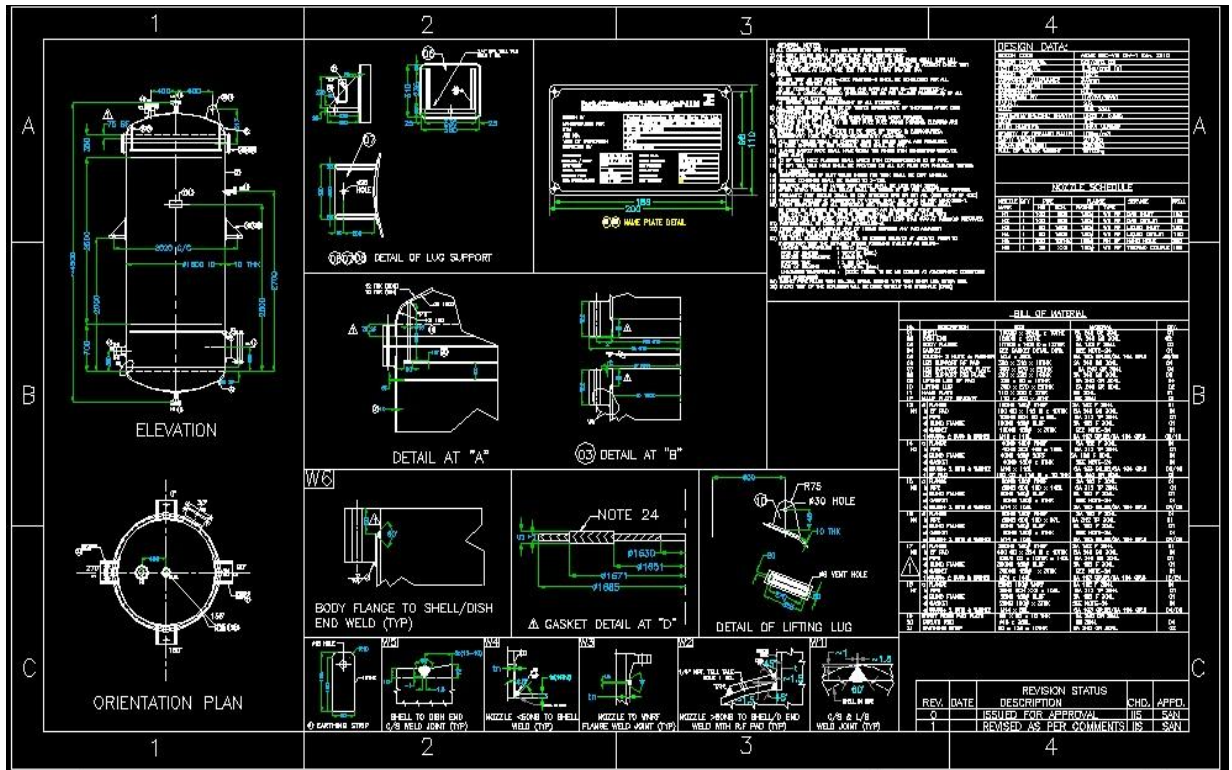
UH-25 Scrubber, Fabrication Drawing
